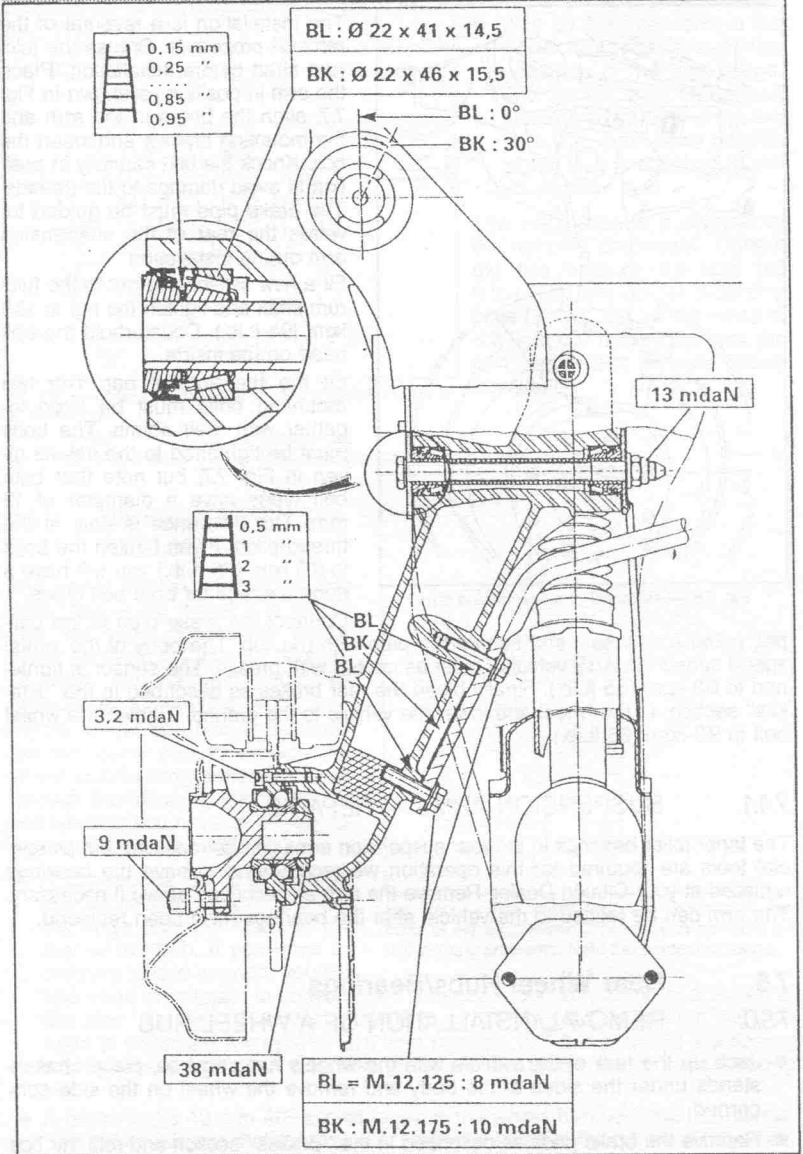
Sectional view of a suspension arm. Note the modifications to the arm bearing and the anti-roll bar attachments, marked with "BL" (Saloon) and "BK" (Estate) respectively. Affected are also the tightening torques for the anti-roll bar attachments. The small ladder signifies where shims must be inserted. Also note the fulcrum shaft nut is located at the inside.
